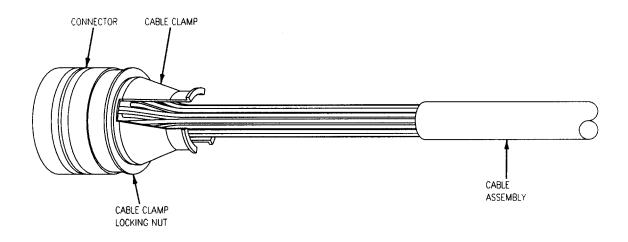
Installing Cable Clamp and Cable Clamp Locking Nut
